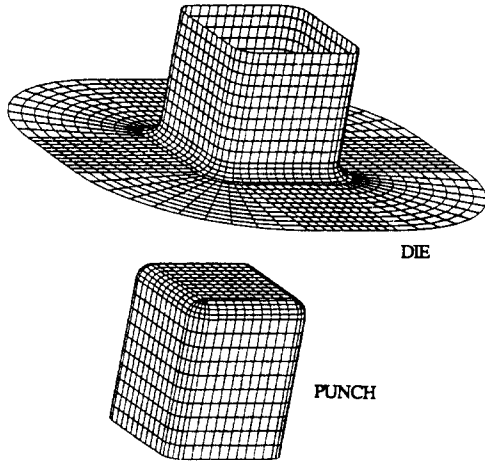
Schematic view of tool surfaces for square cup deep drawing
